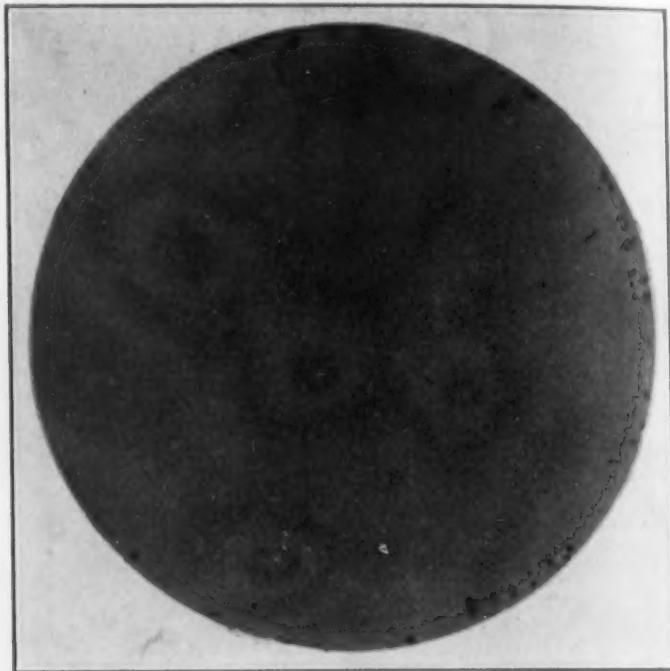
Subcutaneous Holes in Alloy Tool Steel Intended for Taps. Photograph Shows Disk After Etching. Carbon 1.08 Per Cent, Tungsten 1.55 Per Cent, Manganese 0.28 Per Cent. Diameter of Bar 2.625 Inches.
